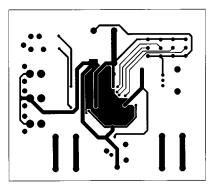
Recommended NJB PC Board Layout: Bottom-Side Layout
